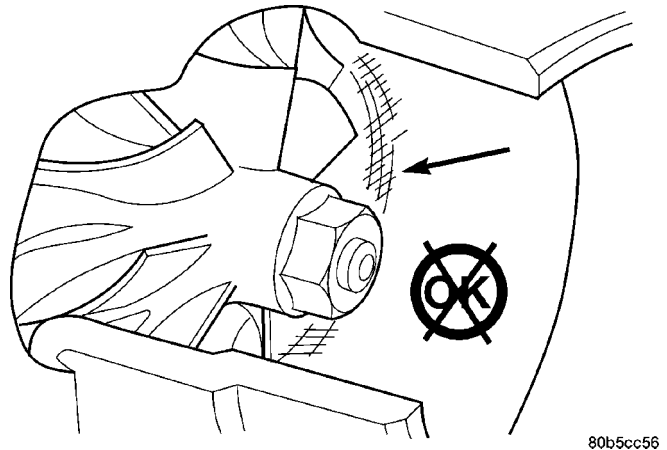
Inspect Compressor Housing for Impeller Rubbing Condition - Typical
